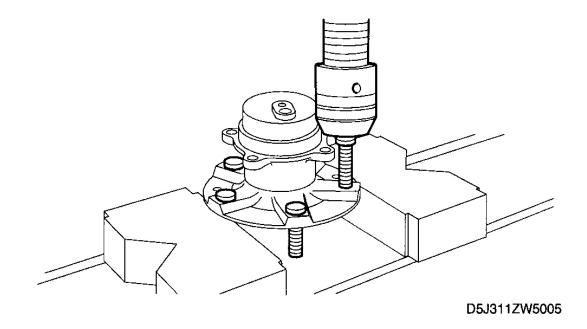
Pressing New Wheel Hub Bolts Into Wheel Hub Using Press Courtesy of MAZDA MOTORS CORP.
